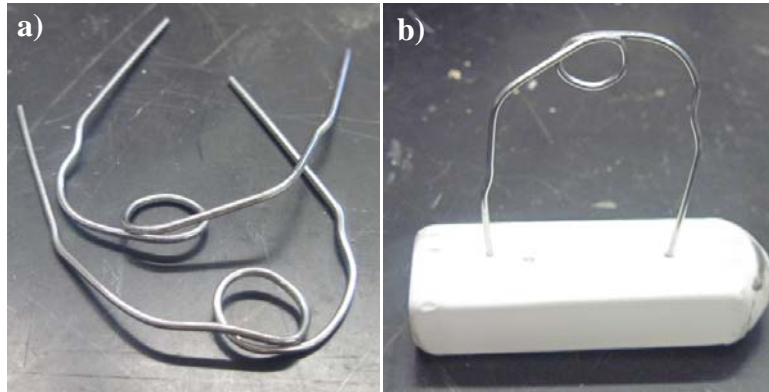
a) Step 2 – making the bearings. b) Step 3 – attaching the bearings.
